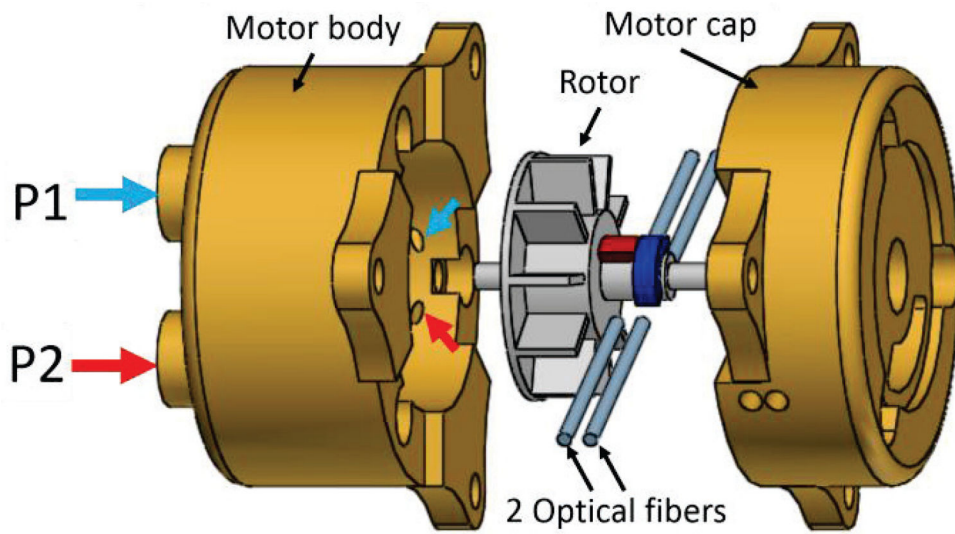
Exploded view of the pneumatic motor, which consists of motor body, rotor, 2 sets of optical fibers, and motor cap. P1 and P2 are the air inlets; small blue and red arrows show the air outlet corresponding to each inlet.
